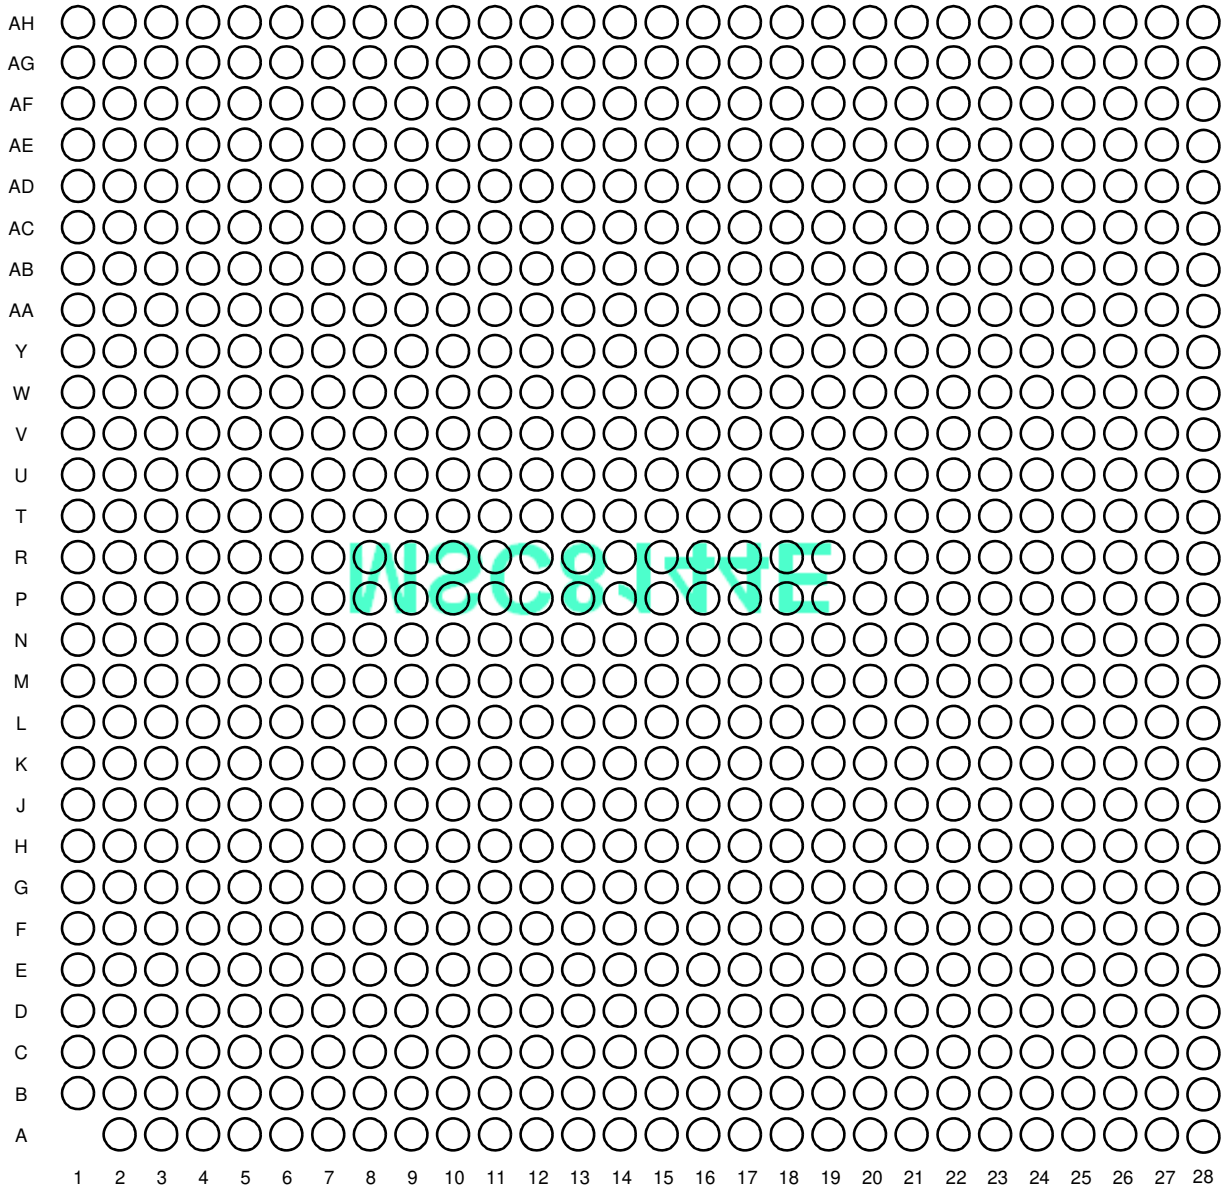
MSC8144E FC-PBGA Package, Bottom View
